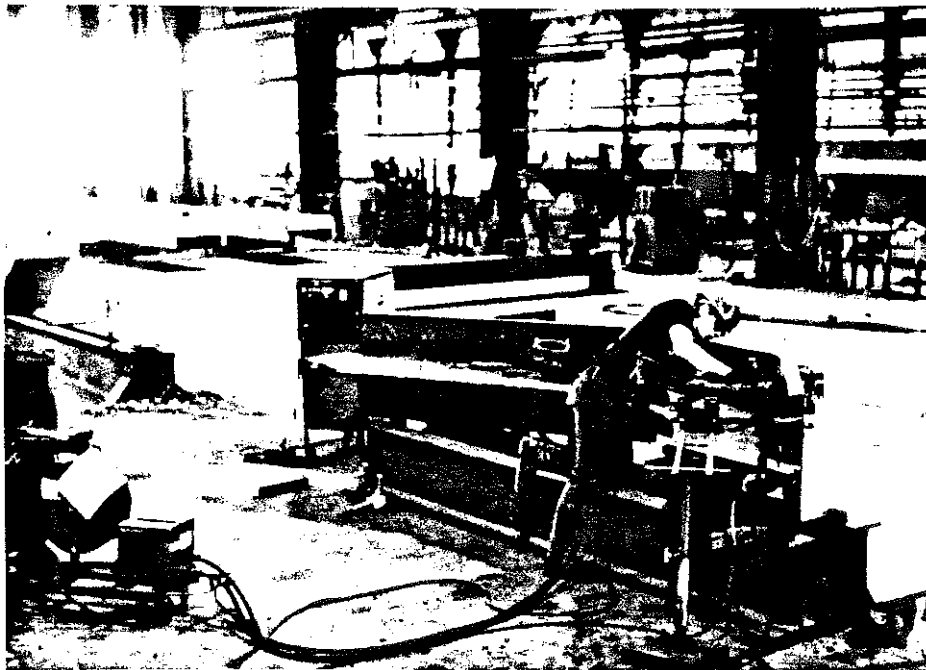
AE Monitoring of a Large Complex Weldment Using Automatic Submerged-Arc Welding. Transducers Are Attached to the Backside of the Flange. The AEWM Is to the Left of the Weldment.
